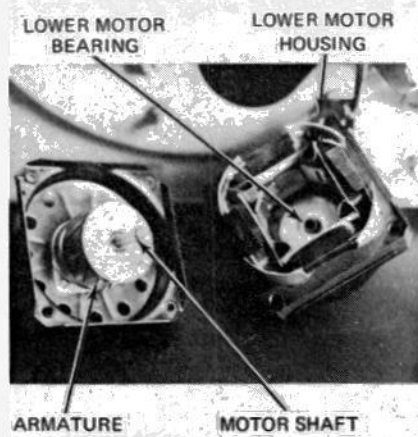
CHECK THE LOWER BEARING for traces of dirt or other foreign matter. Clean with cotton swab.
